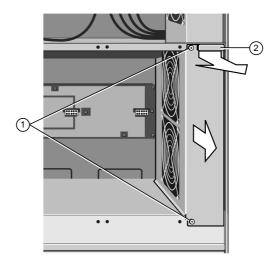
Removing the Hard Disk Cooling Fan Assembly
